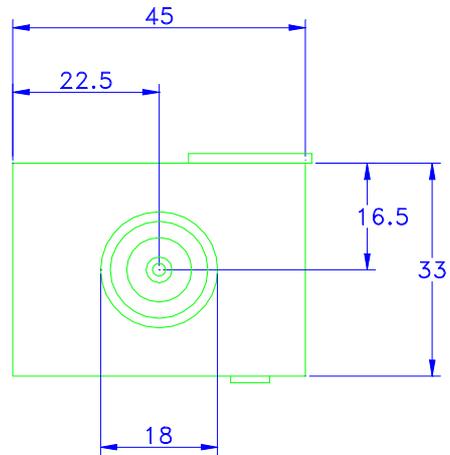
Dimensioned Drawing of Inductive Head IH2
